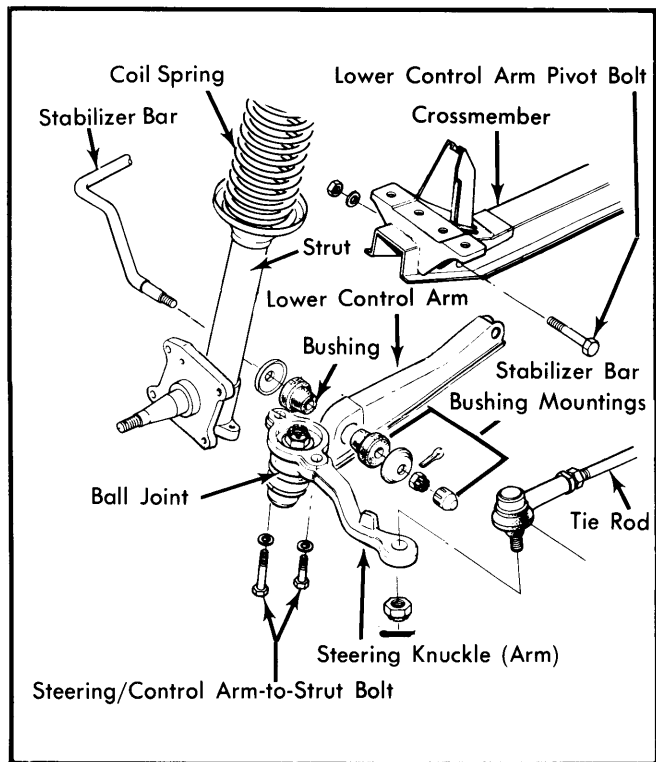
Exploded View of GLC Front Suspension (RWD Models)
